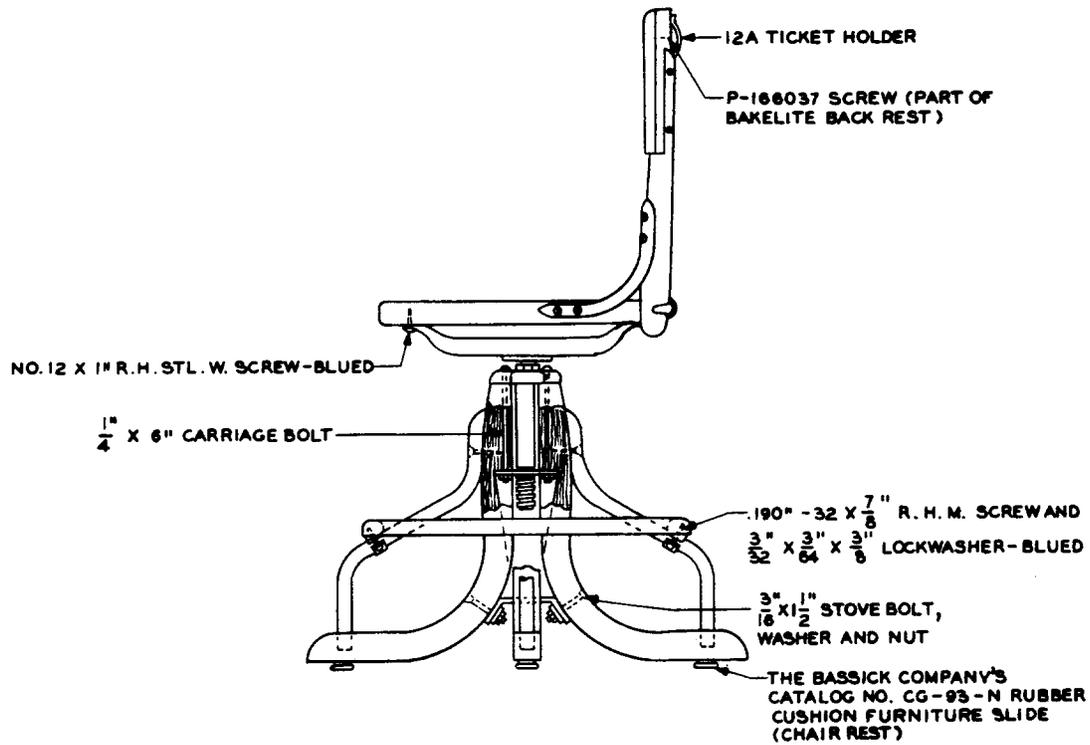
KS-5168 Bentwood-type Operator Chair (Center Spindle)
